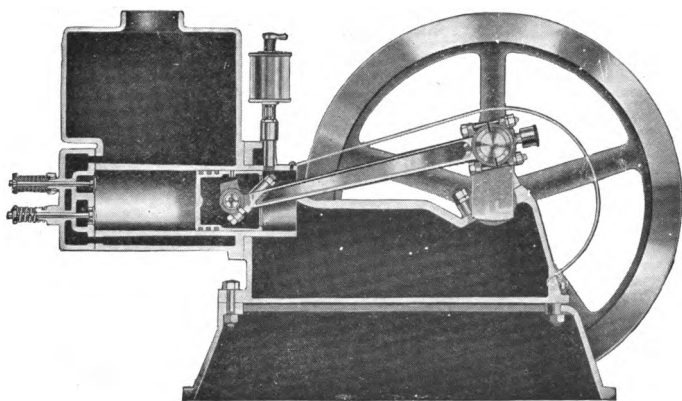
Sectional Elevation "Ingeco" Engine.
